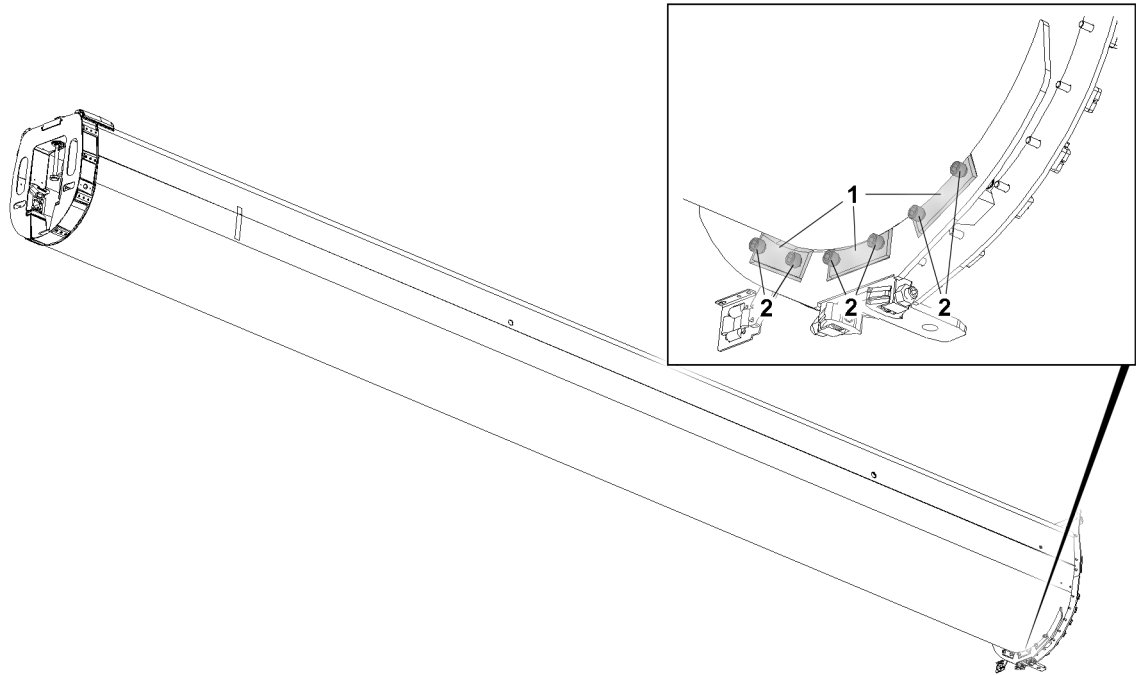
Exemplary illustration of the adjustment plates on the telescope
